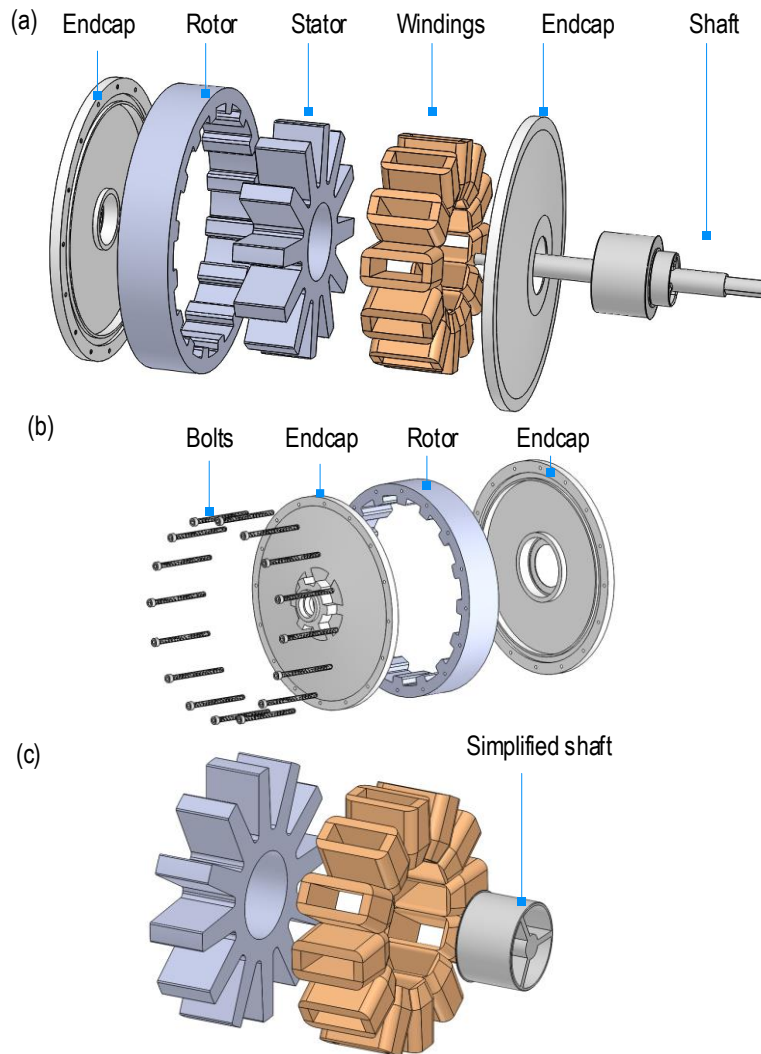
Assembly of the 12/16 E-bike SRM, (a) motor assembly, (b) rotor-endcaps subassembly, (c) stator-shaft-winding subassembly.
